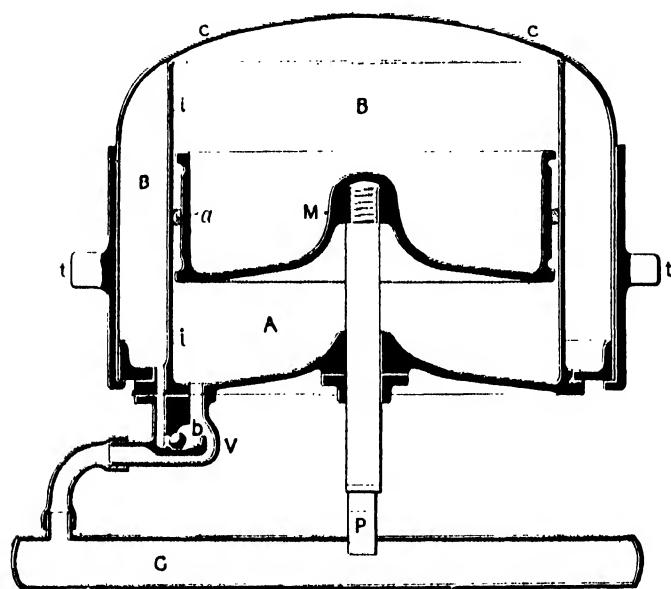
Clayton Brake Cylinder. "Brakes on" position
